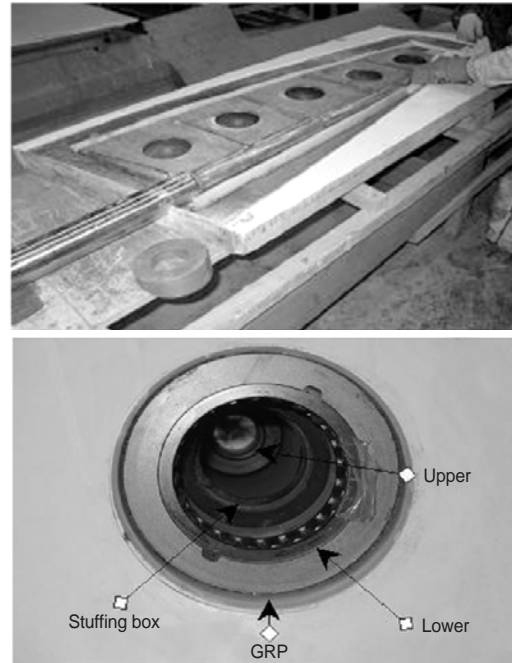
Assembly of bearing and stuffing box & rudder production.
